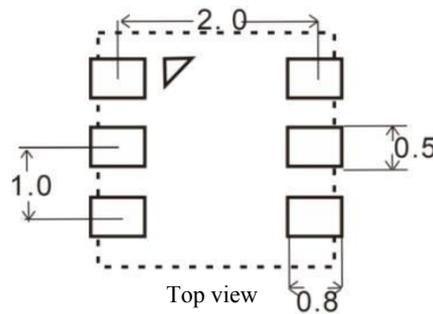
Recommended sensor PCB design dimensions (unit: mm), the outer dashed line part is the external dimension of the SMD package.
